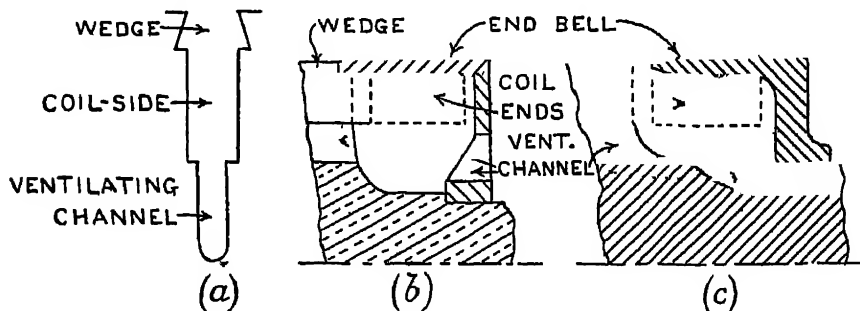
(a) Rotor Slot; (b) and (c) End-bell Designs.
